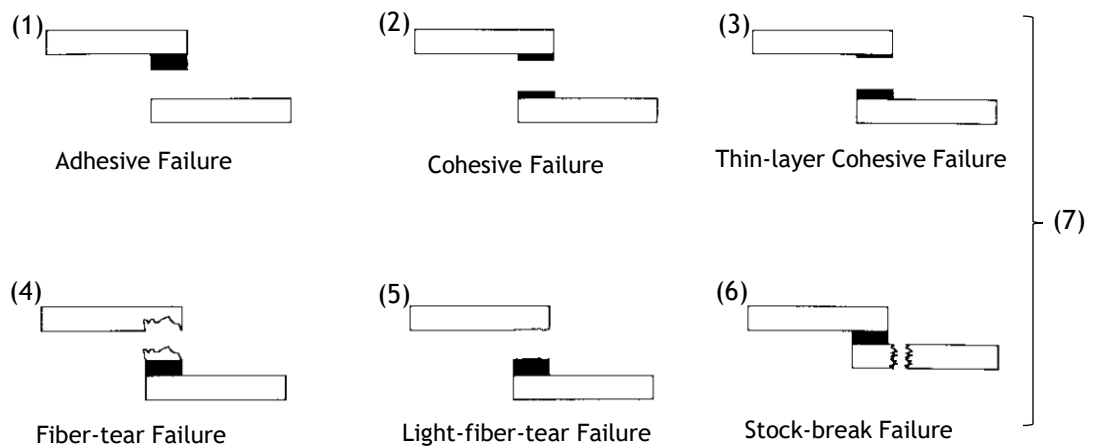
Typical modes of failure in FRP adhesive joints [59]
